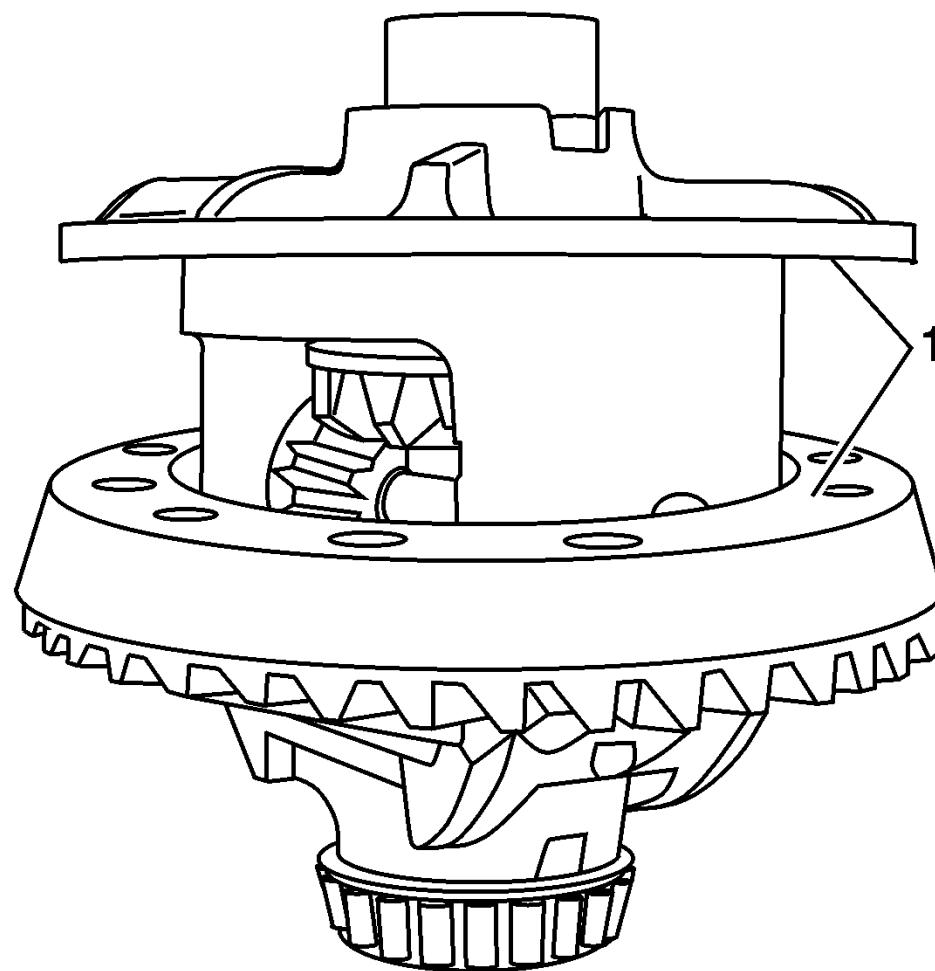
Mating Surfaces Of Ring Gear And Differential Case
